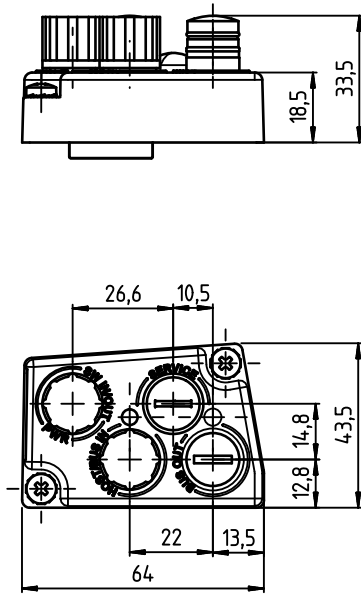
Dimensioned drawing BPS with MS 304 connection hood
